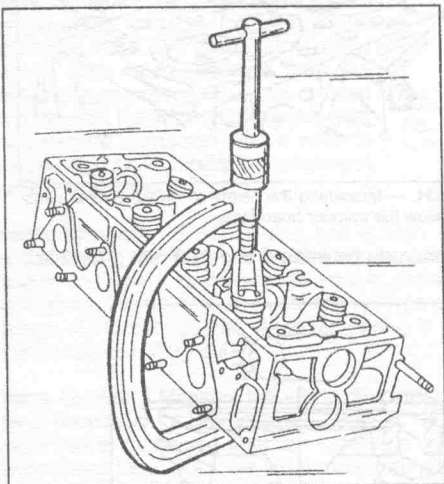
Removal of the valve springs and valve with a valve spring compressor.
